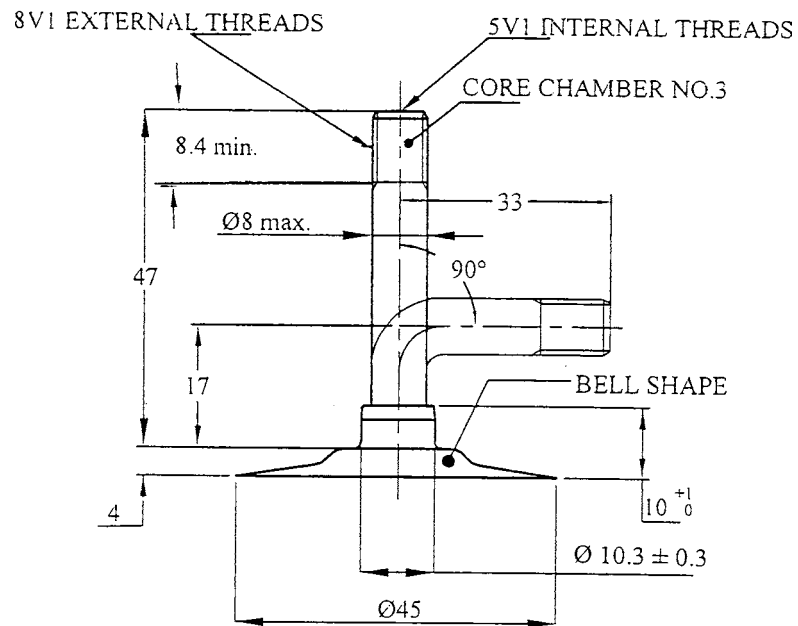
RUBBER COVERED TUBE VALVES — PASSENGER CAR
